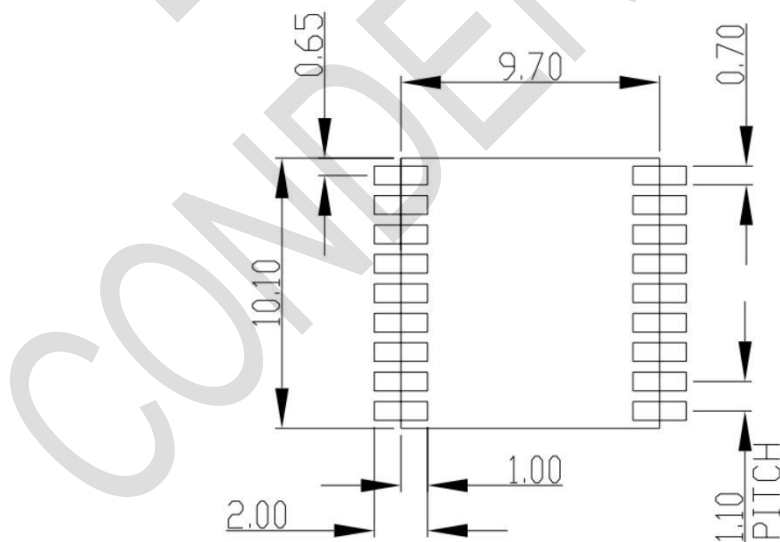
Recommended PCB decal (top view) (Unit: mm)
